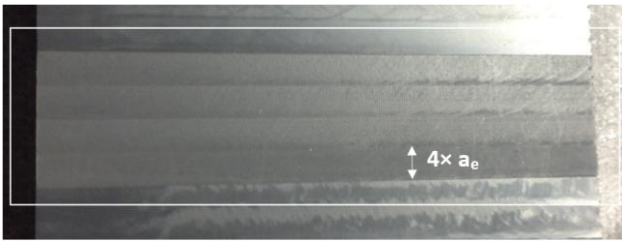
Face Surface Machined by Mill 54AX EDM-G
